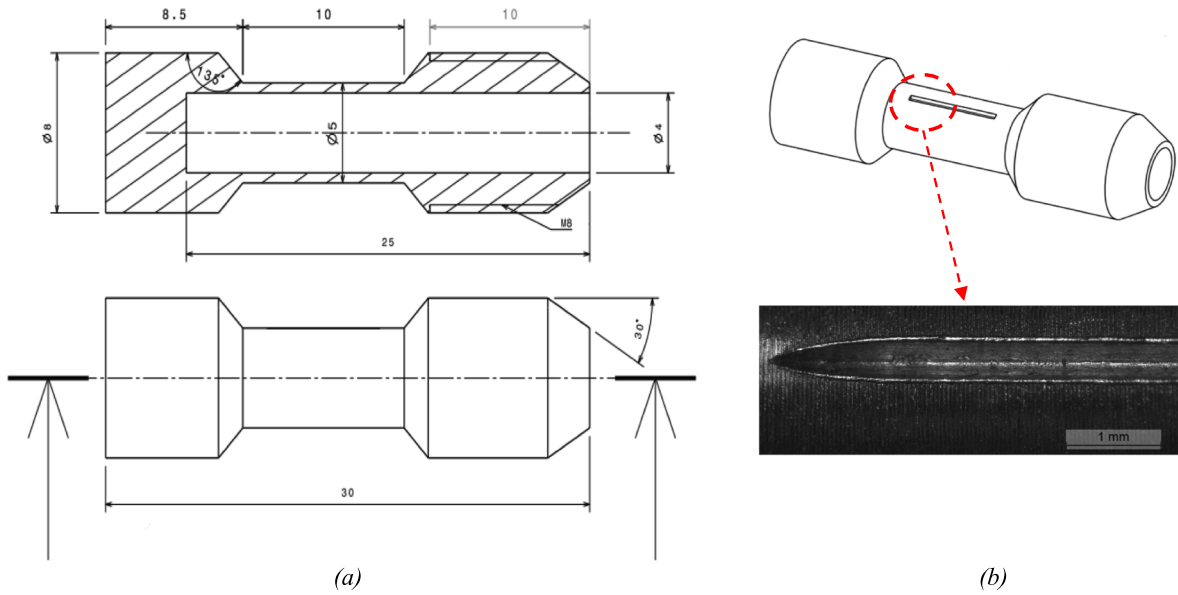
(a) Notched cylindrical specimen (dimensions in mm). (b) Notch detail.
